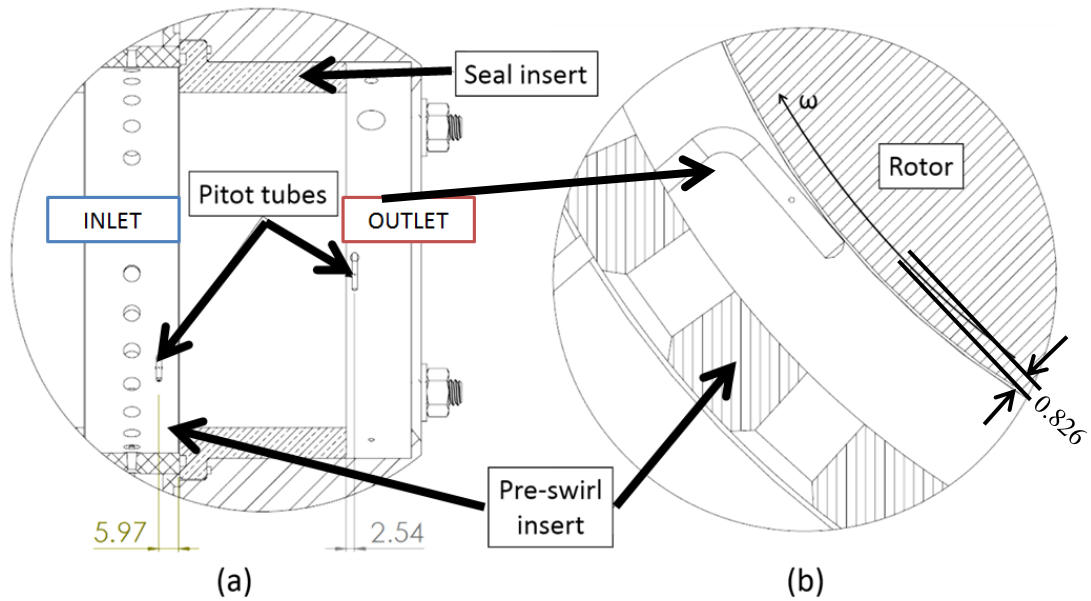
(a) Side cross section depicting pitot tube placement at inlet and outlet (b) axial cross section of stator housing depicting pitot tube placement with relation to rotor. Note dimensions presented are in mm.
